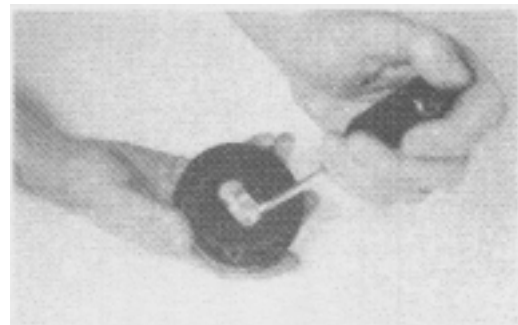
To replace reed if necessary, remove two mounting screws as shown.
